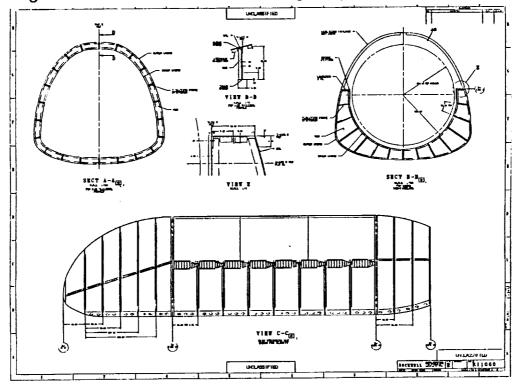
Medium CTRV Design Layout Drawing (2of2)
